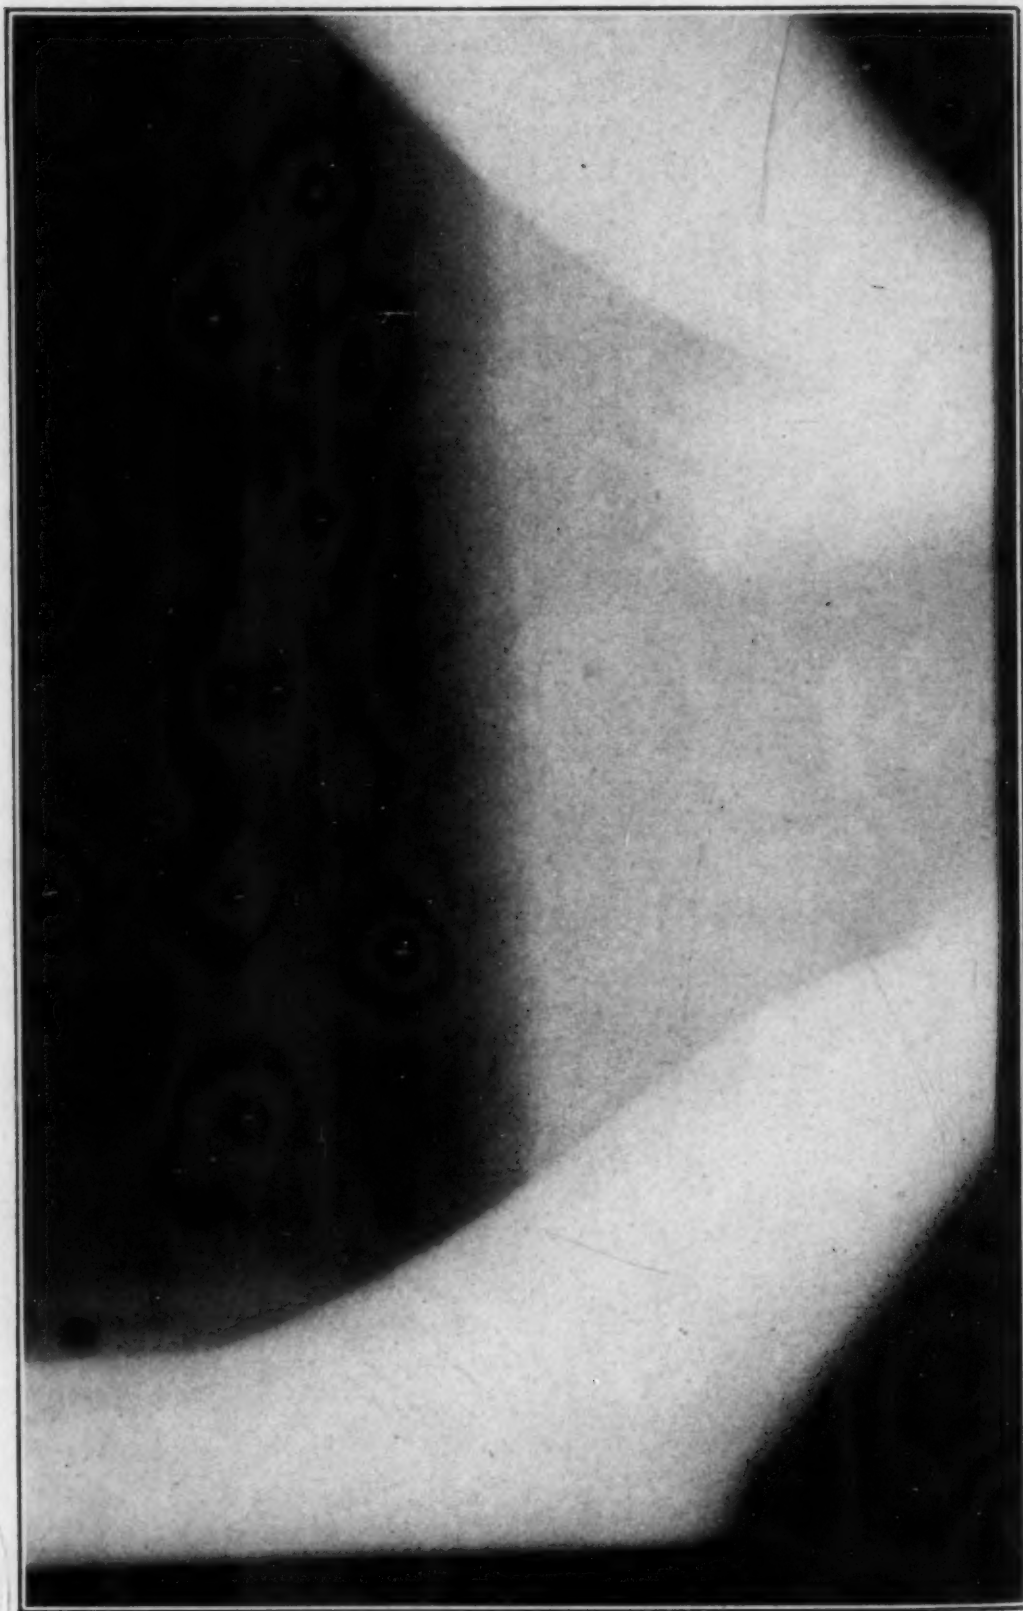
Radiograph of Gas Holes in Aluminum Casting.
